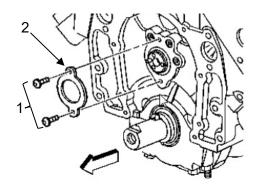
Install Camshaft Retainer (2) and two (2) Camshaft Retainer Bolts (1)
